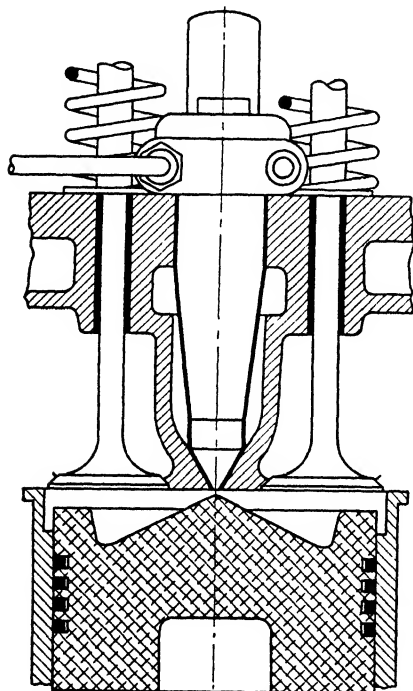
COMBUSTION CHAMBER OF CUMMINS ENGINE.
